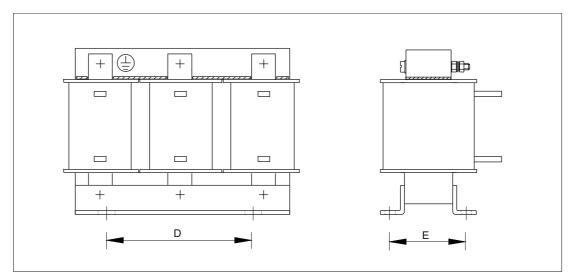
Mounting dimensions of line reactor, frame size FSF
